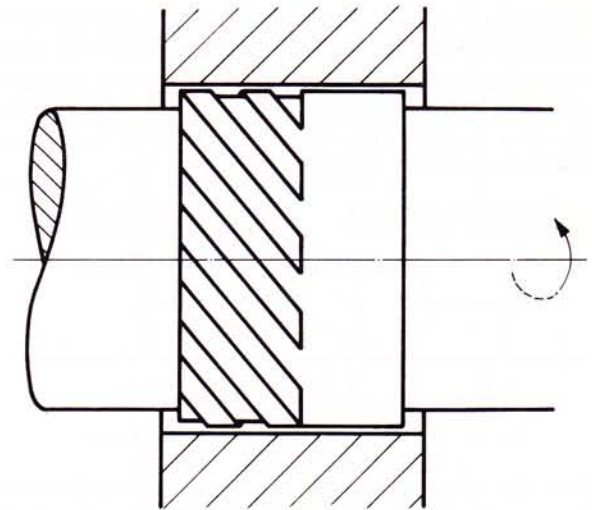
Journal bearing, partly grooved; asymmetrical pattern
